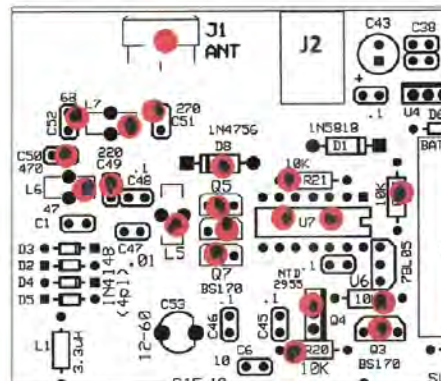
Part of a drawing from the instruction manual that shows where the parts for Section 7 go. The parts to be inserted in this section are marked with red dots. The author added black dots as he installed each part.
